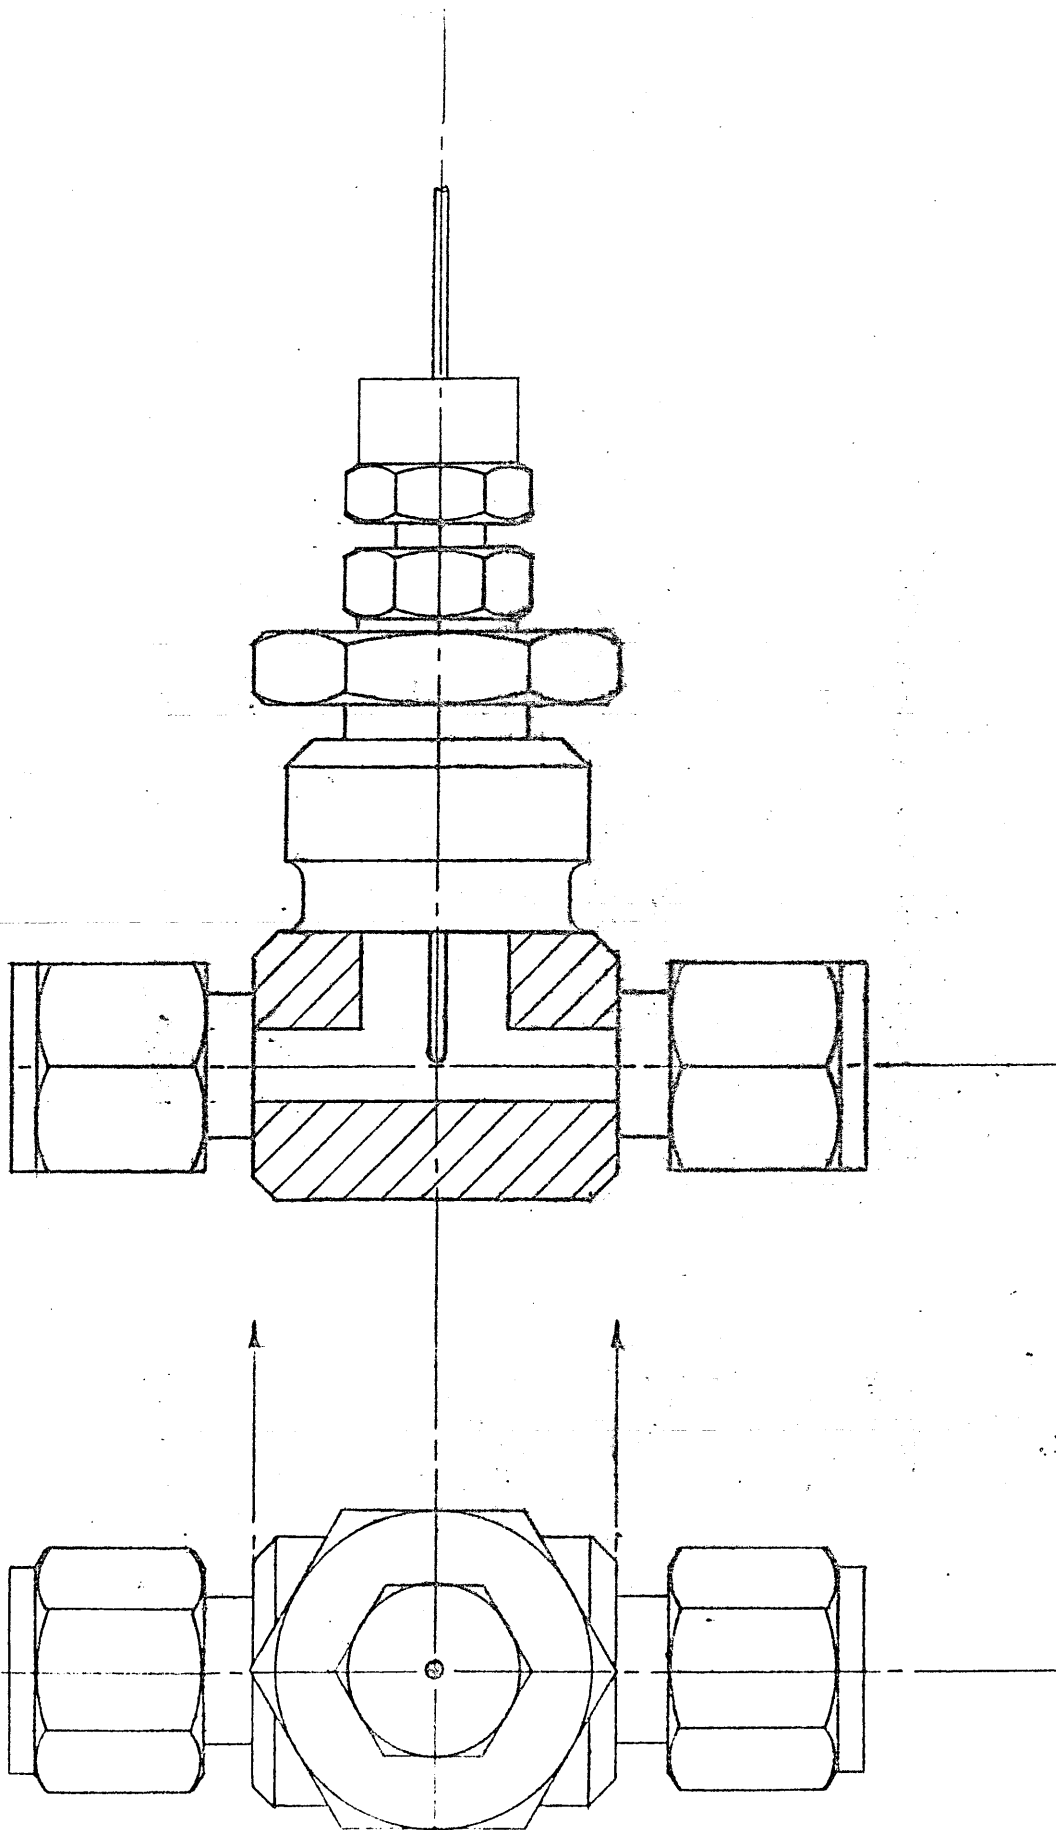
A compression fitting adapted for holding a thermocouple probe.
